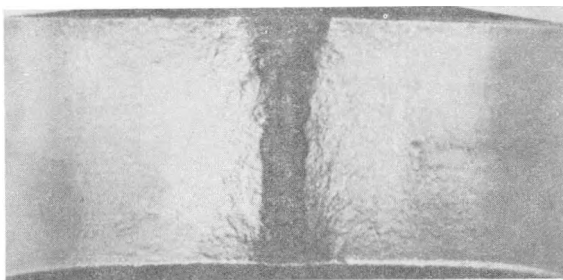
Free face bend specimens from pipe weld deposited with fully austenitic electrode H.
